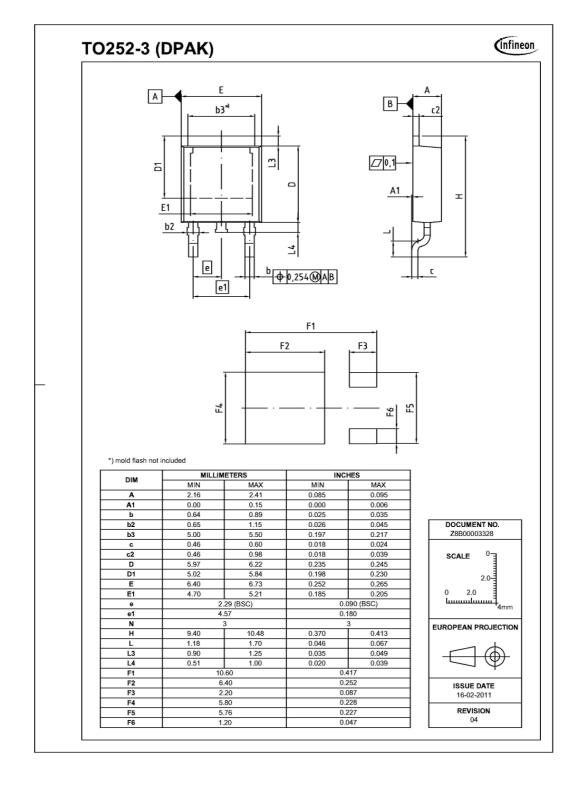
Outline PG-TO 252, dimensions in mm/inches
